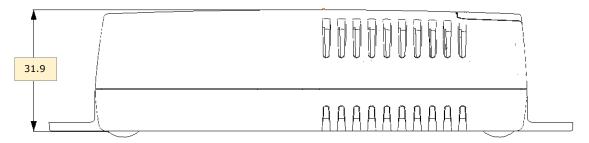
LDSBus 2CH NL Relay Dimension - Side View
